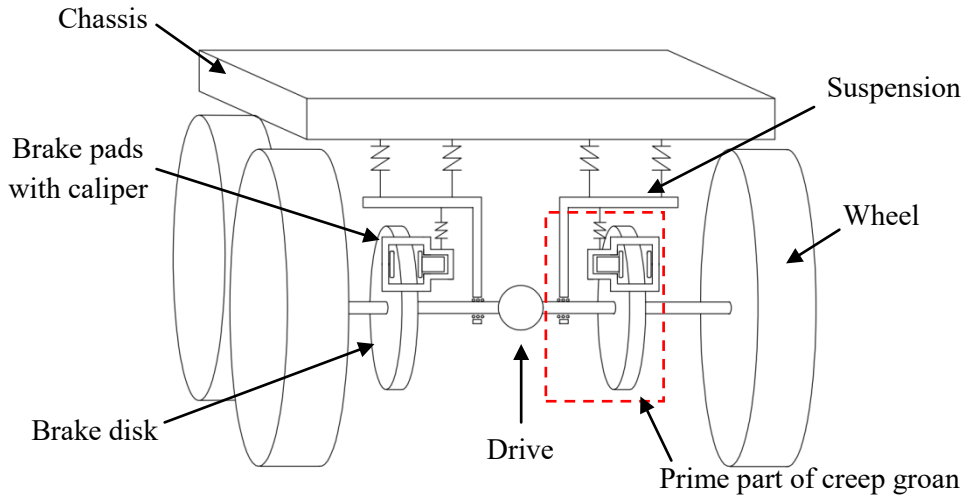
Structure of a front-wheel drive vehicle in front view
